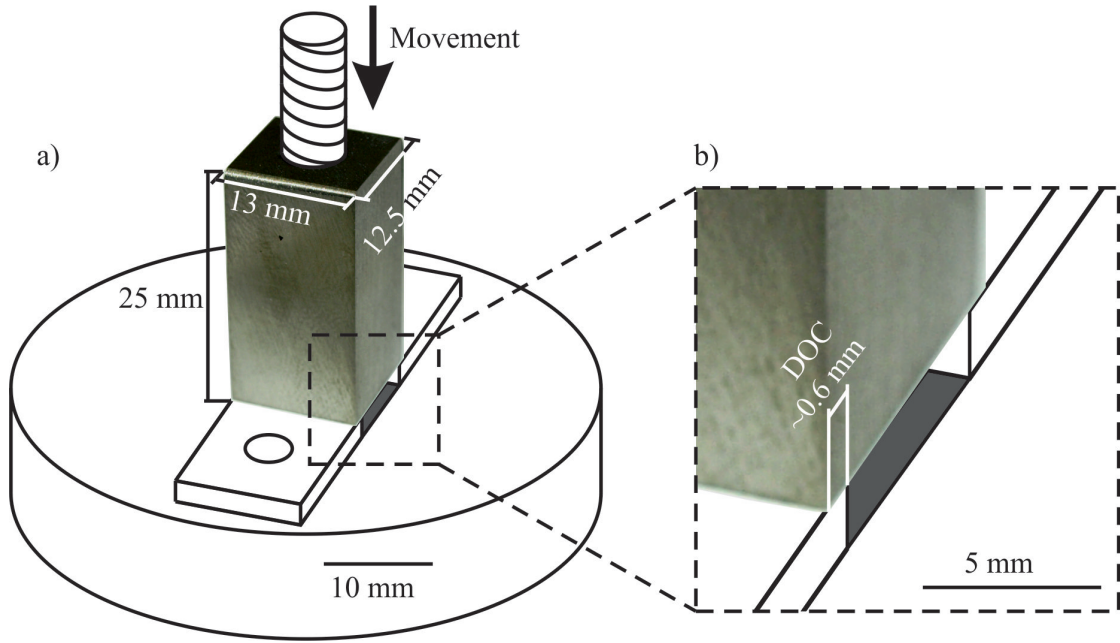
a) Schematic and photo composition showing sample geometry and b) Illustrating specimen/tool interaction with respect to depth of cut.
